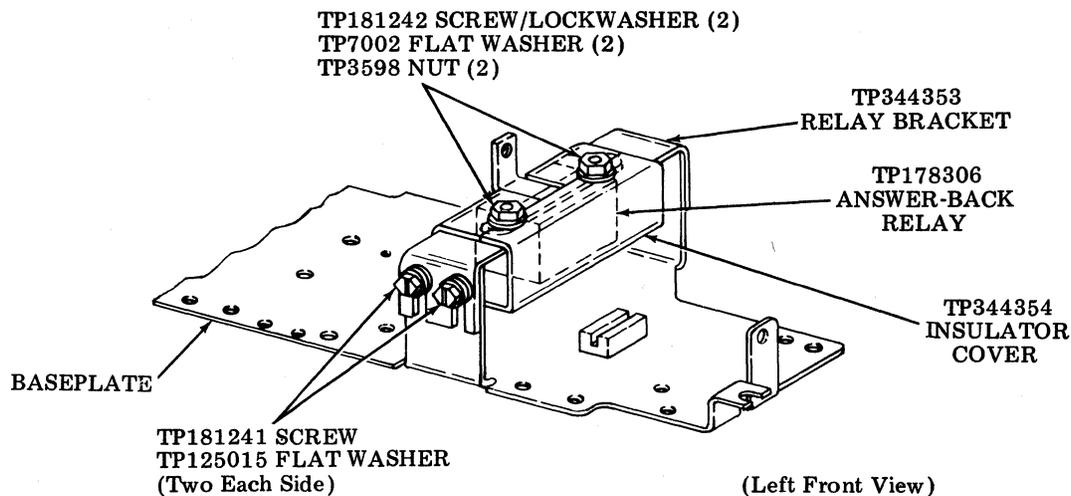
Answer-back Relay Assembled to UCC39 Baseplate
